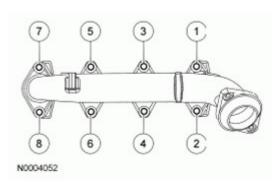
Identifying Tightening Sequence Of LH Exhaust Manifold Bolts Courtesy of FORD MOTOR CO.
